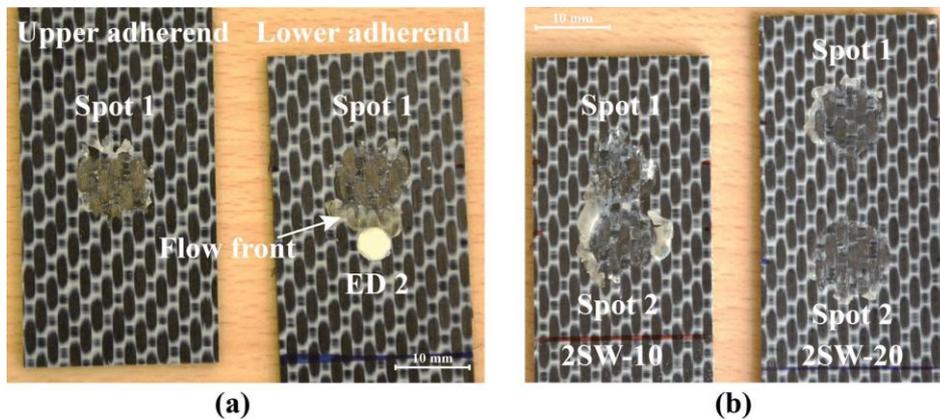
(a) Fracture surfaces of the 2SW-10 joints with only one spot welded and (b) the comparison of fracture surfaces between the 2SW-10 and the 2SW-20 joints.
